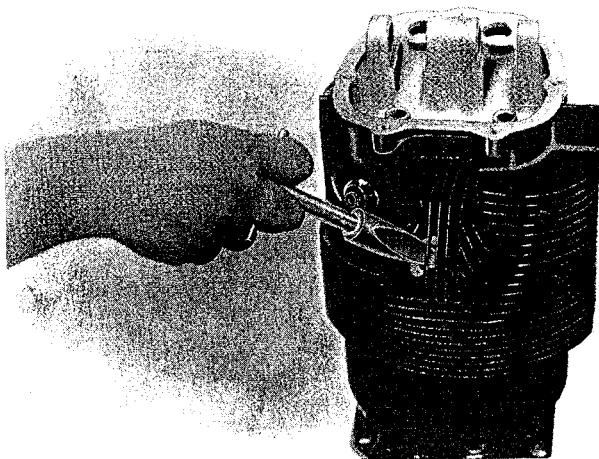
Removing Spark Plug Hole Helical Coil Insert.
